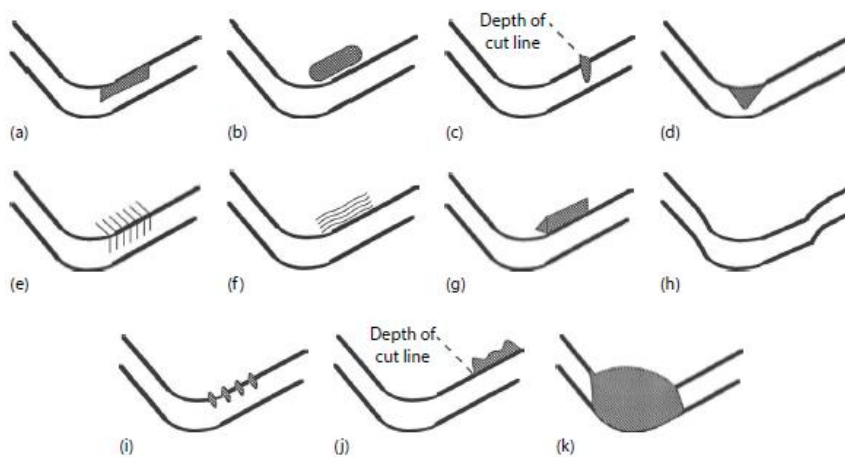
Types of wear on cutting tools: (a) flank wear; (b) crater wear; (c) notch wear; (d) nose radius wear; (e) comb (thermal) cracks; (f) parallel (mechanical) cracks; (g) built-up edge; (h) gross plastic deformation; (i) edge chipping or frittering; (j) chip hammering; (k) gross fracture (Stephenson and Agapiou 2016).
